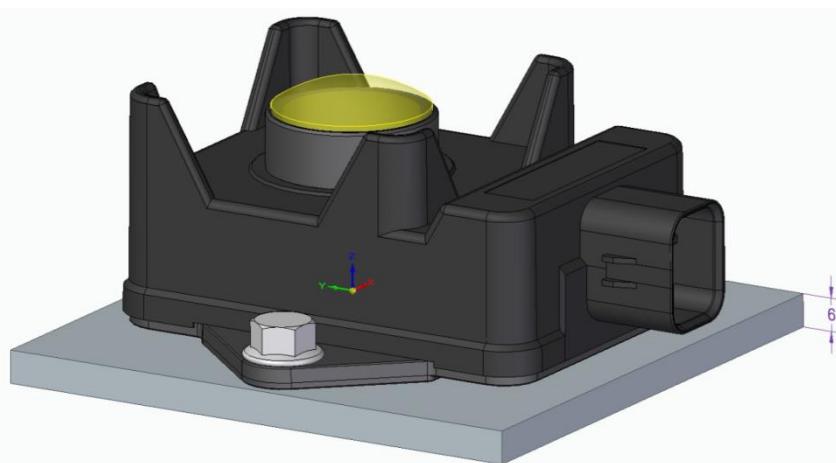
Mounting on a thick soft steel plate (≥ 6 mm).
